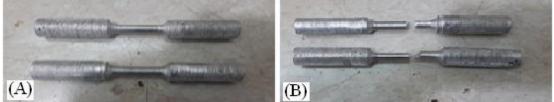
Tensile specimens: (A) Before testing (B) After testing
